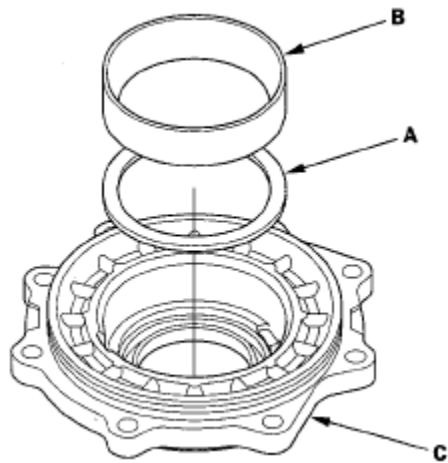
Identifying Thrust Shim And Bearing Outer Race
